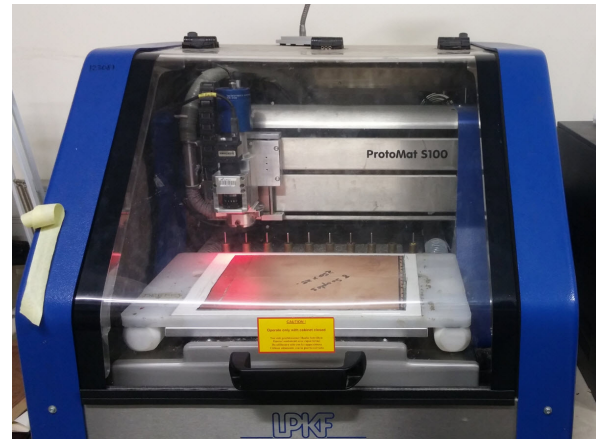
PCB machine cutting the samples and mock-up structure panel profiles.
